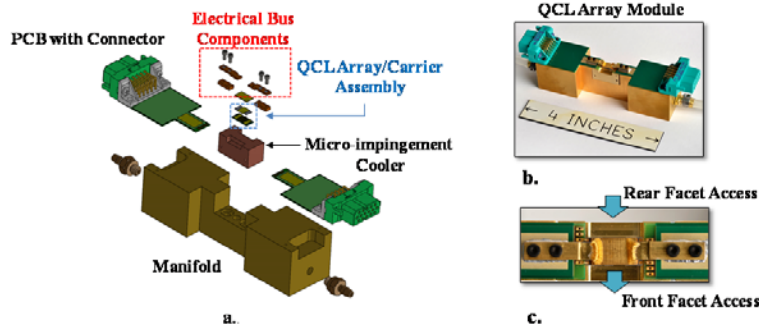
(a) Exploded view of components comprising module. (b) Realized module. (c) Top view illustrating facet access.
